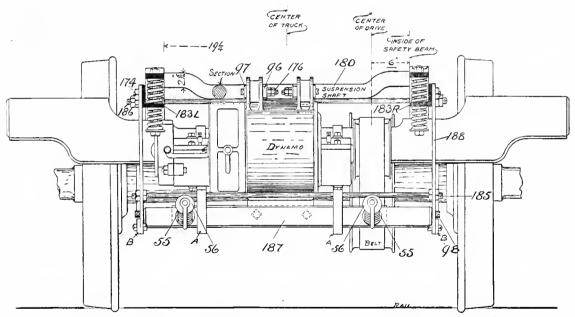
Application of Moskowitz Car Generator to Truck, Using Belt Drive.
